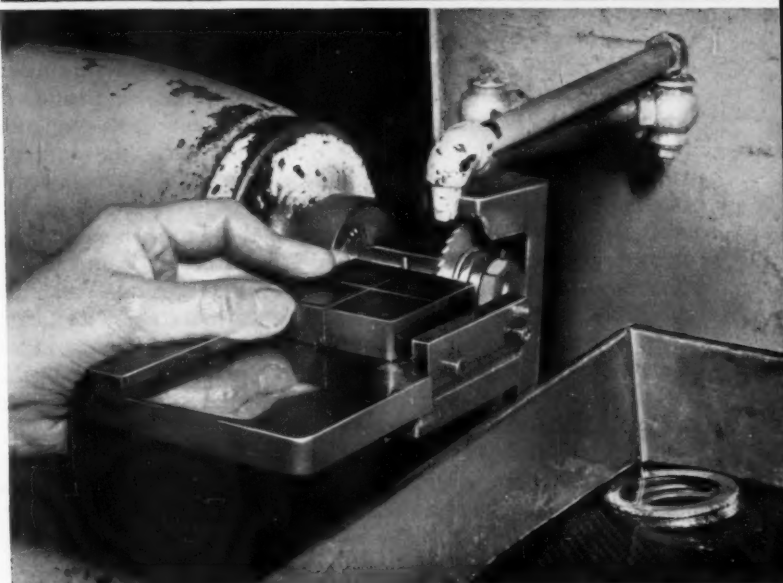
Type-segment is joined to gear-sector by means of three spot-welds. Segment is located from raised characters by means of seven spring-loaded plungers.
